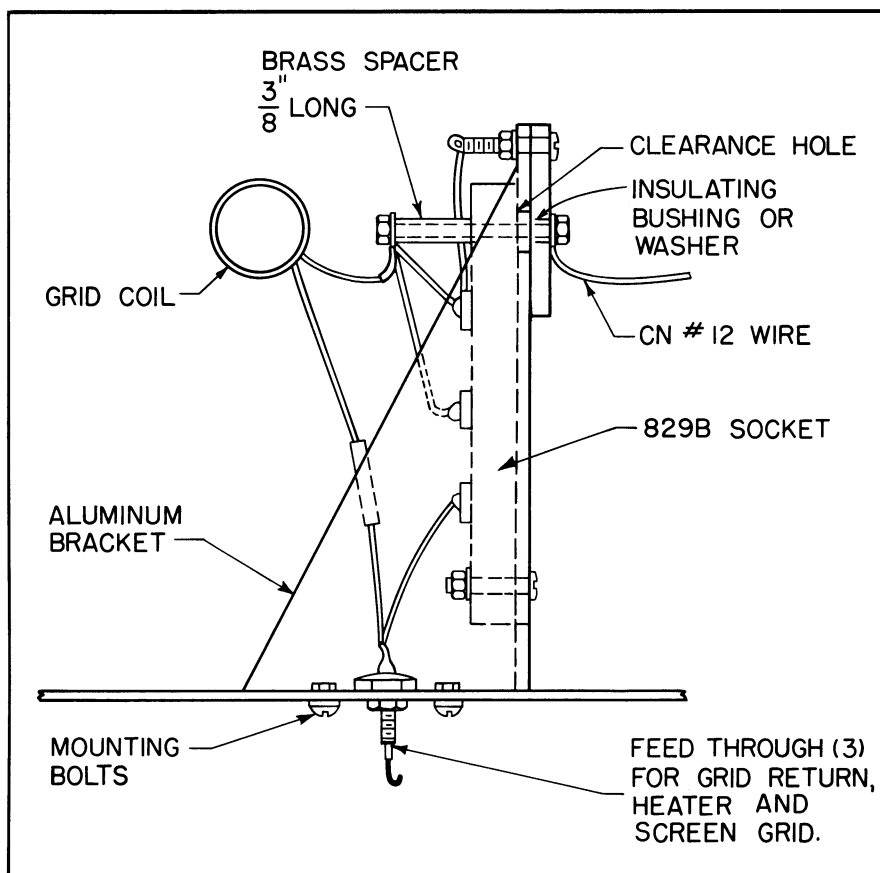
Sketch of grid assembly shows details of grid coil mounting and neutralizing capacitors.
